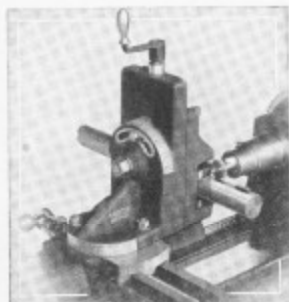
Milling a Woodruff Keyway in a Steel Shaft
